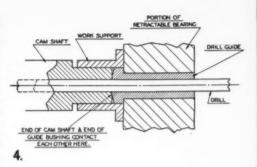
It is important, in deep hole drilling with carbides, that the drill guide bushing contact a machined surface at the end of the work prior to drill entry—as illustrated in this diagrammatic sketch. Preferably, it should also revolve with the work. This insures that the drill starts on center. If the drill is correctly started, it will—of itself—stay on center as long as it has been correctly sharpened.
